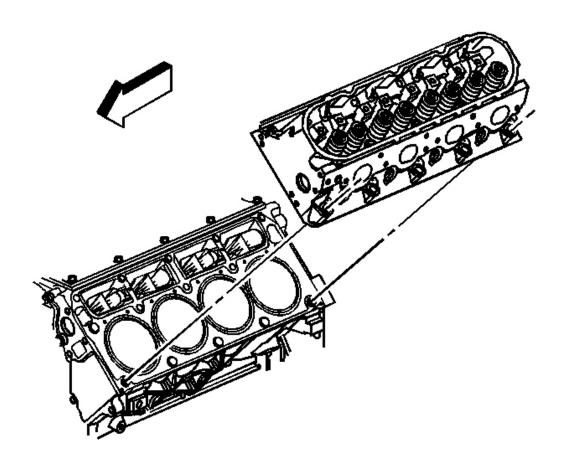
View Of Cylinder Head (Left) Courtesy of GENERAL MOTORS CORP.
